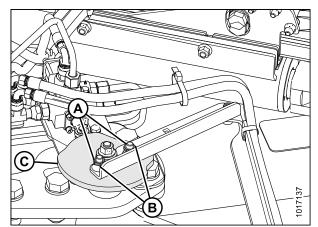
Transport Deploy/Swing Mechanism Assembly
